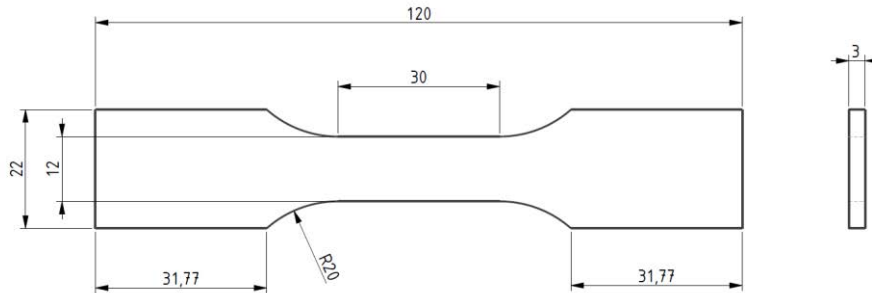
2D technical drawing of the plain specimens that have been used for the tensile tests.
